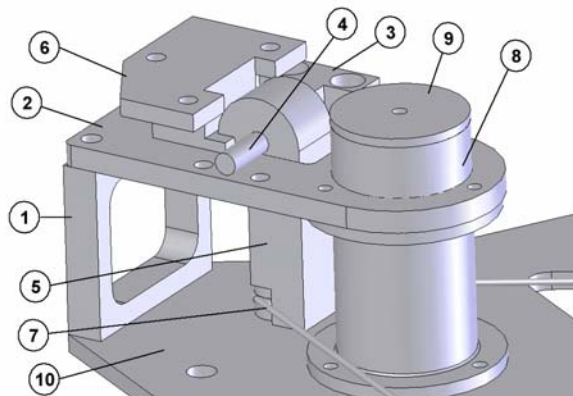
The Ejection Mechanism (the second shaft bracket is not shown)
